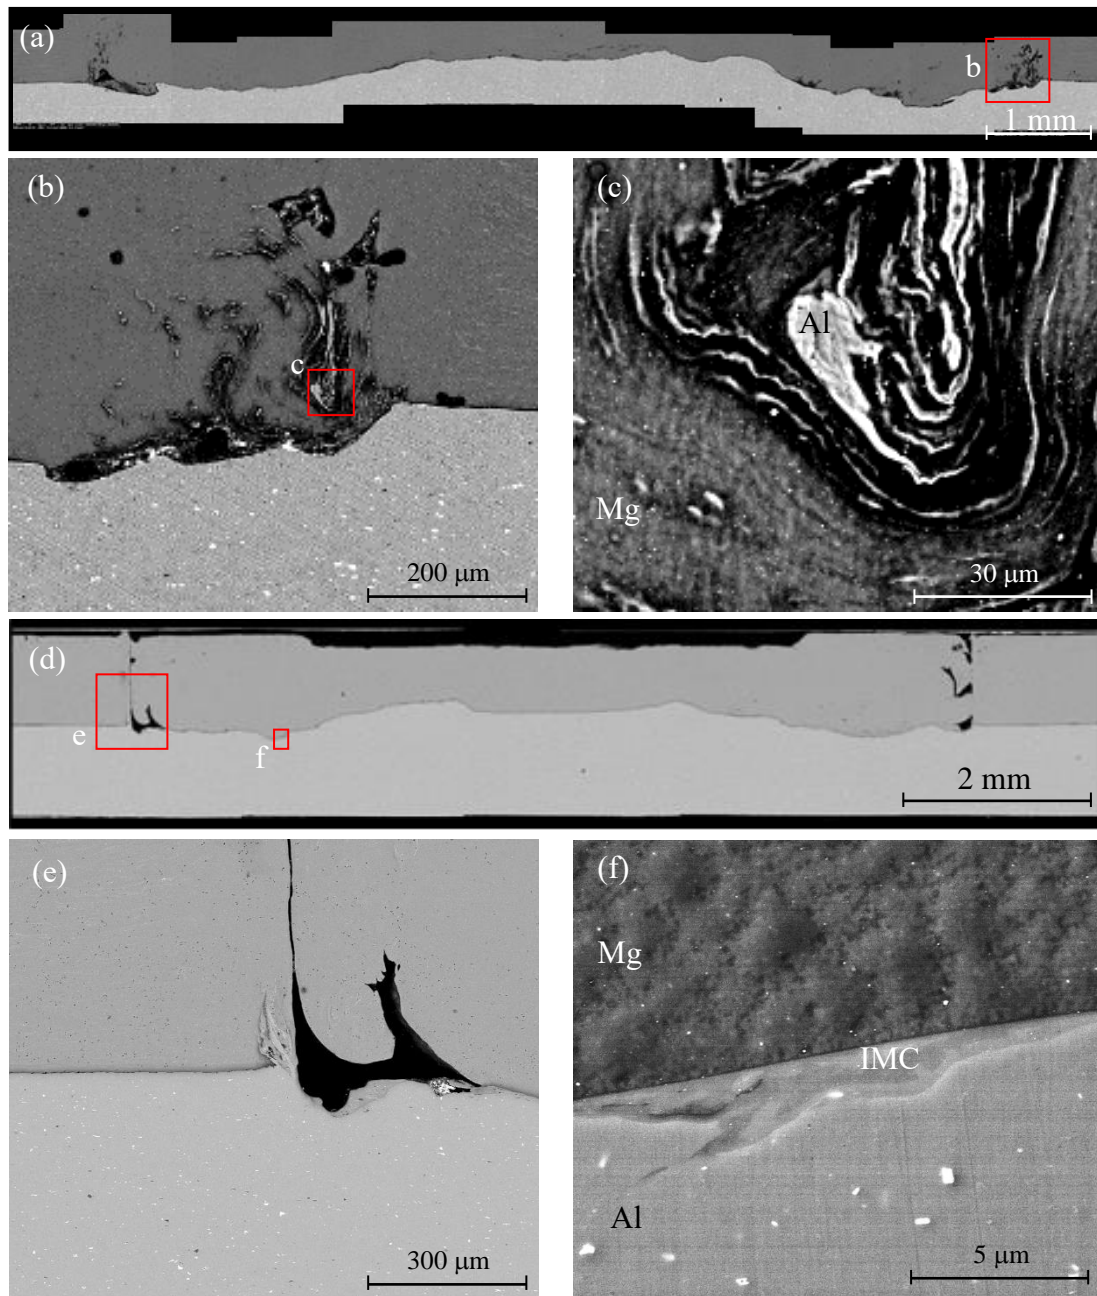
Backscattered SEM micrographs of the cross-section of Mg to Al welds produced using welding conditions of 1900 rpm, 1.0 s, 1.0 mm with Mg on the top: (a) with the conventional RFSSW process, showing (b) defects at the edge of weld (a); (c) Al fragments at the edge of weld (a) and (d) using the modified RFSSW process, showing (e) voids at the edge of weld (d); and (f) joint interface, marked by the red rectangle in (d).
